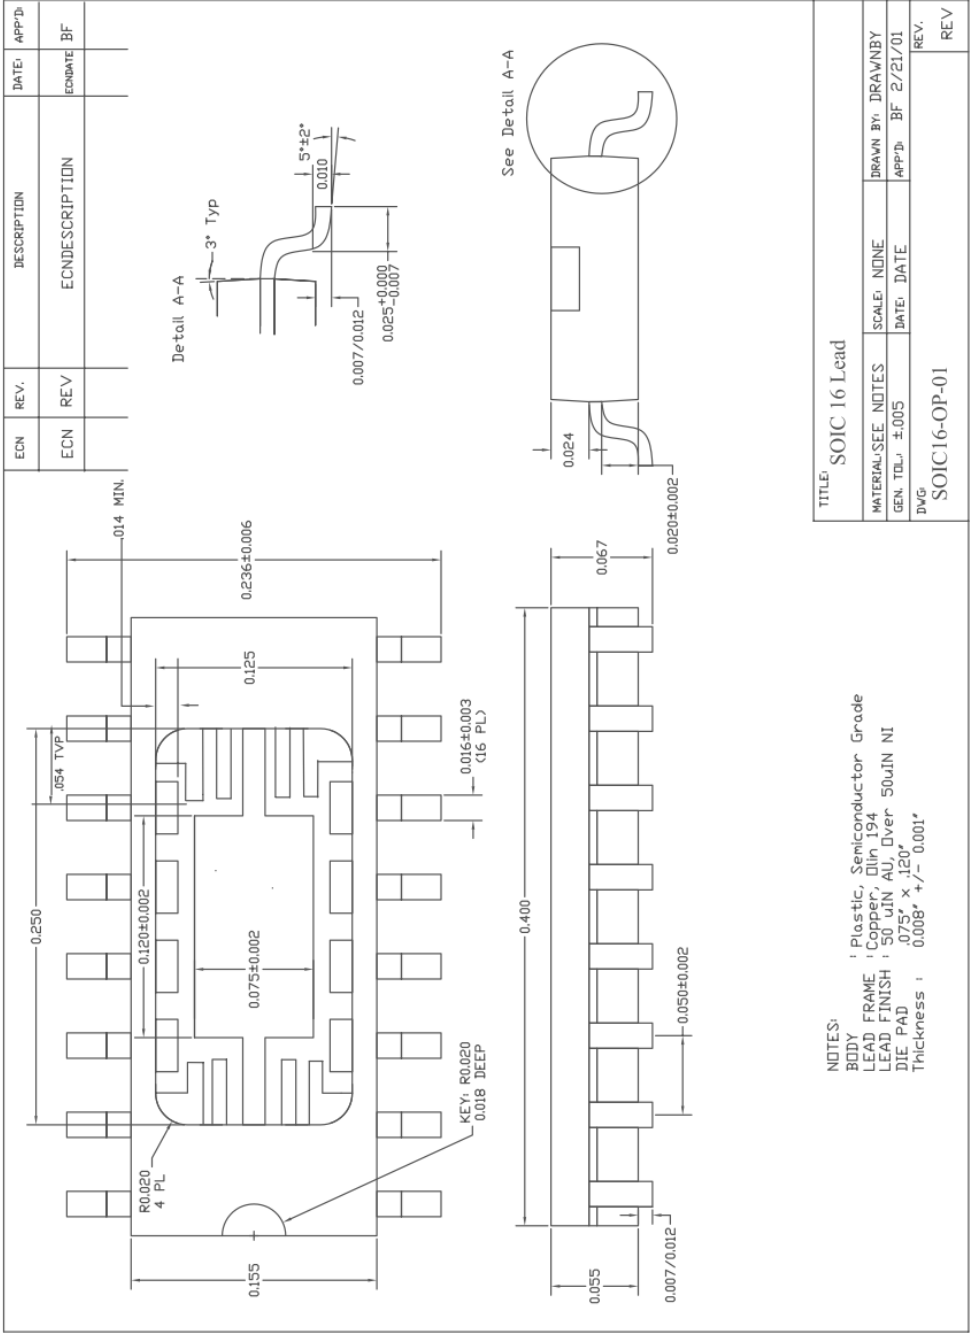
Physical dimensions of SOIC-16 open-top prototype package for MS8892
